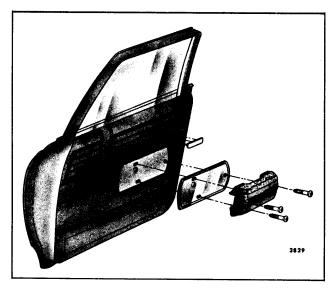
Applied Type Door Arm Rest "A" Styles Shown
